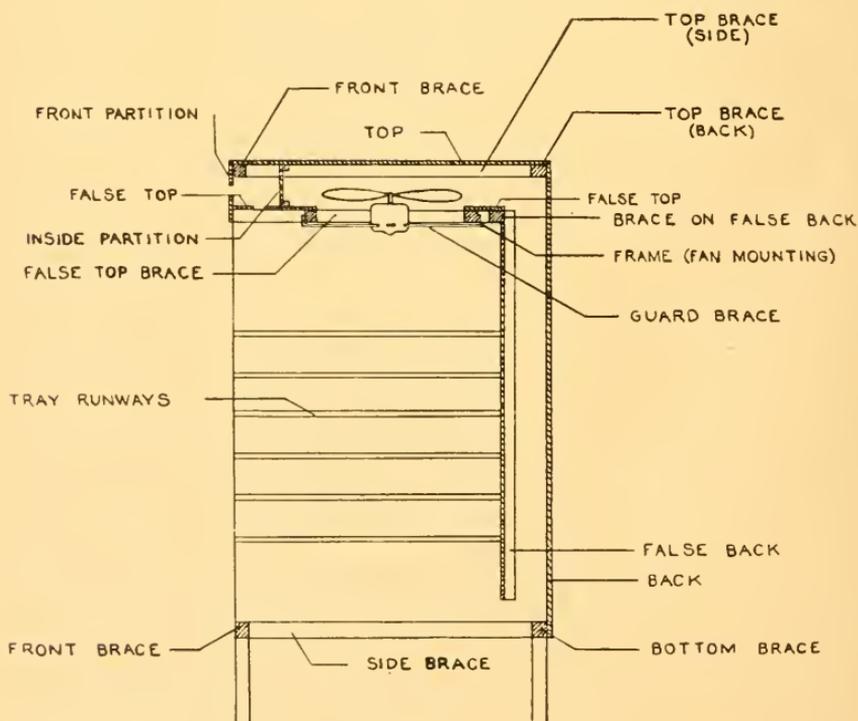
a. Detail of Forced Draft Dehydrator showing method of mounting fan and cross-section view of cabinet
